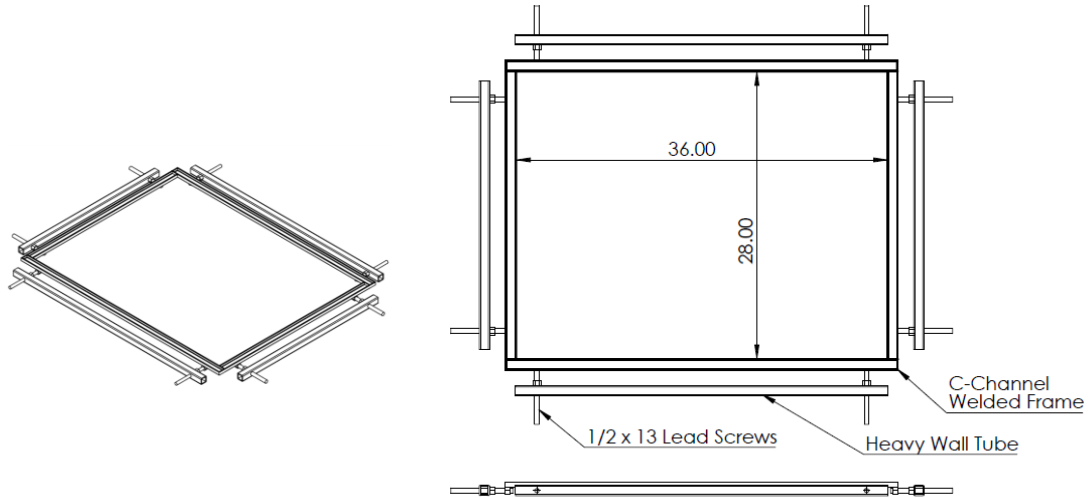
Kevlar® test specimen tension frame schematic used in fabrication of validation specimen door (all dimensions are shown in inches)
